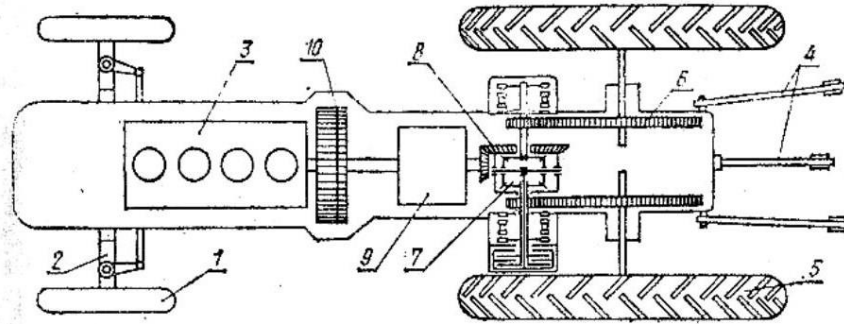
The main parts and mechanisms of the MTZ-80 wheeled tractor
